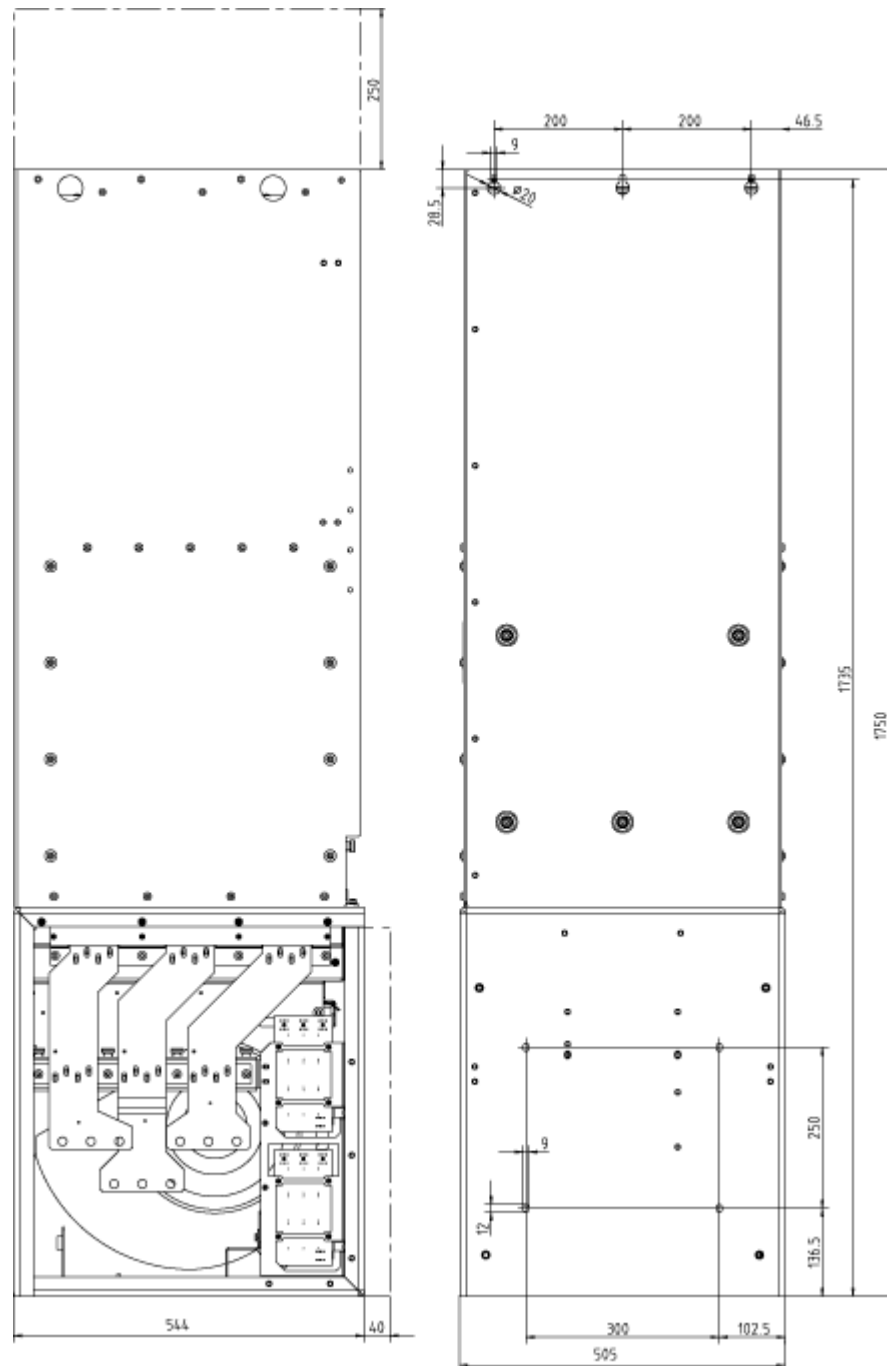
Dimension drawing for Active Interface Module, frame size JI Side view, rear view
